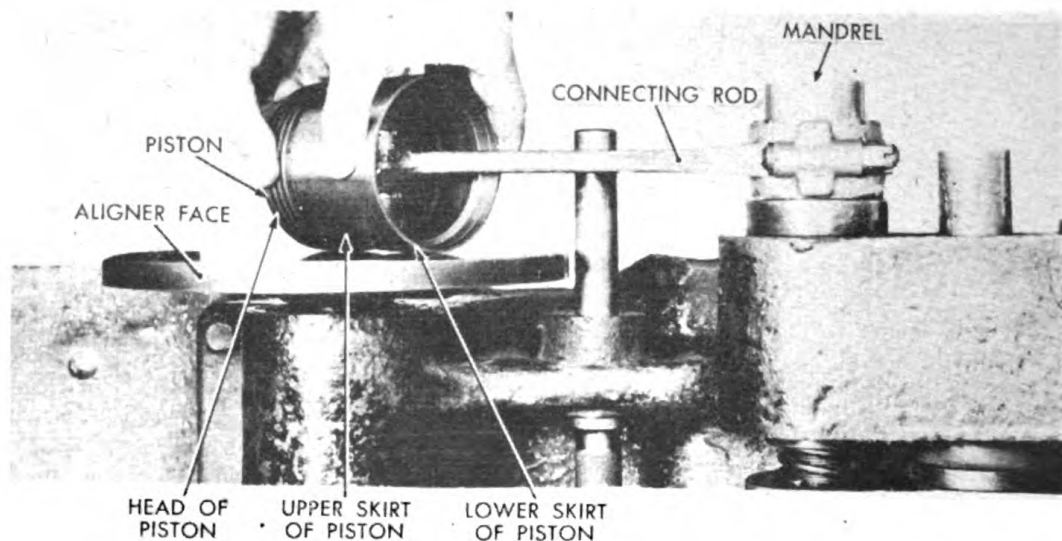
Checking the Alignment of Connecting Rod and Piston.
